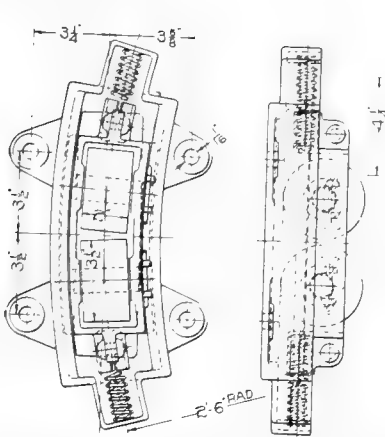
Drexel Double Roller Side Bearing for Freight and Passenger Service.
